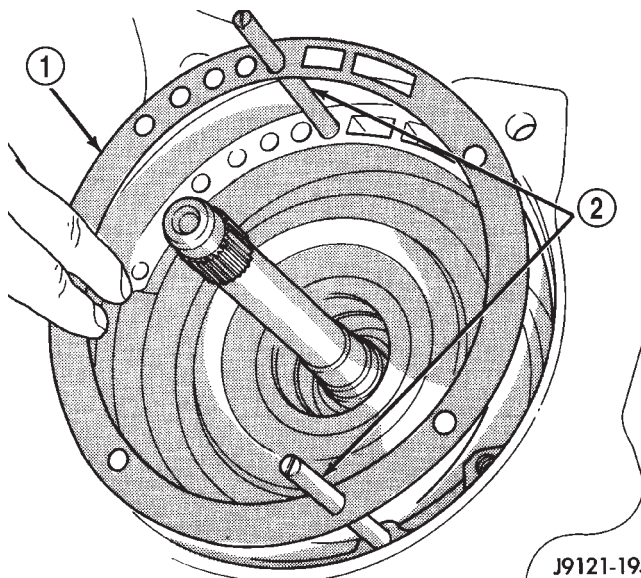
Installing Pilot Studs And Oil Pump Gasket
